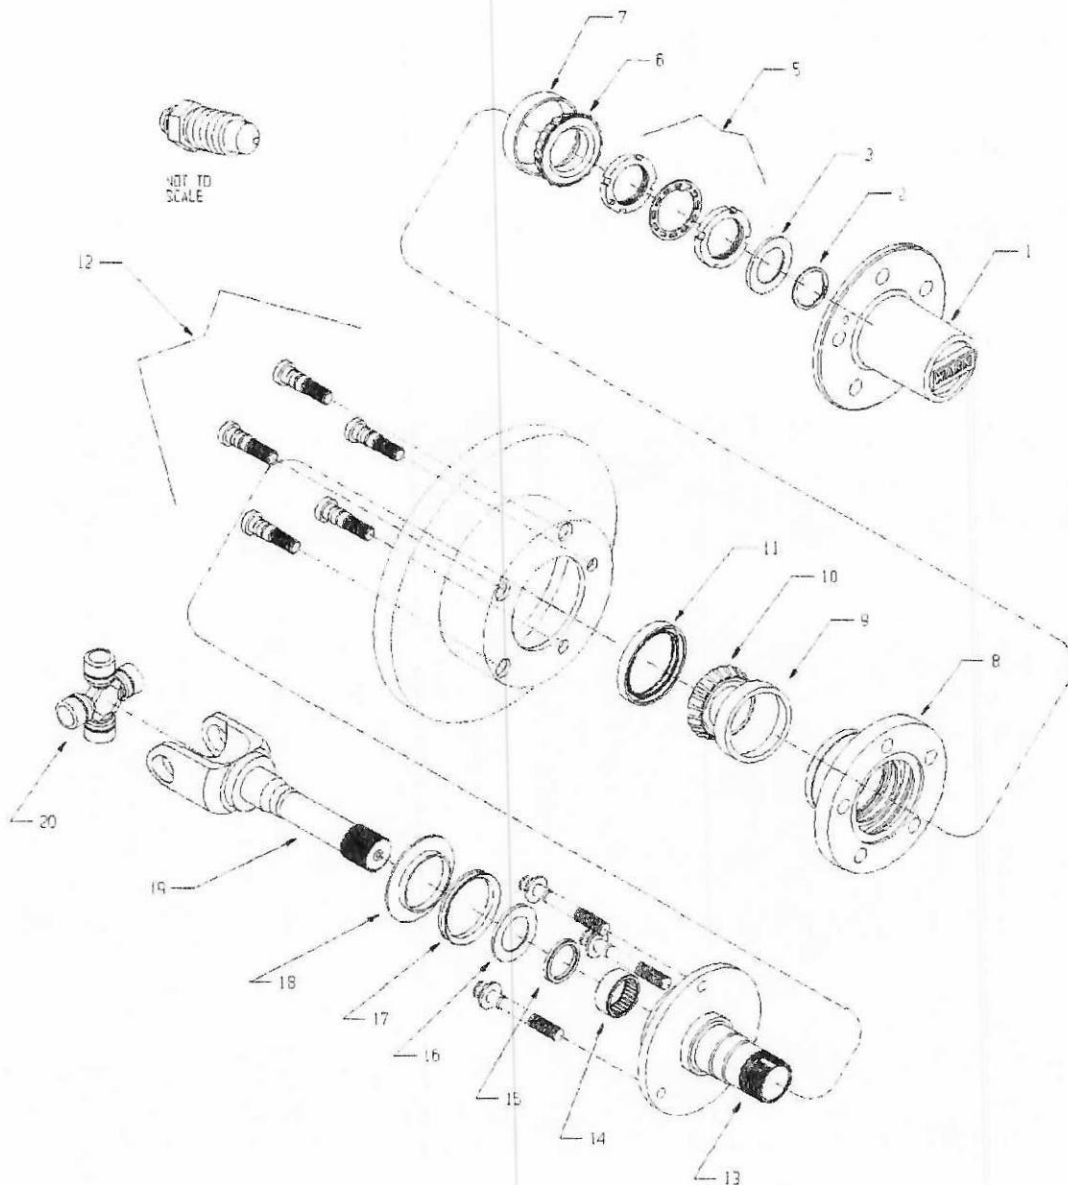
Front axle wheel hub conversion kit. Parts not included in kit are drawn with dashed lines
